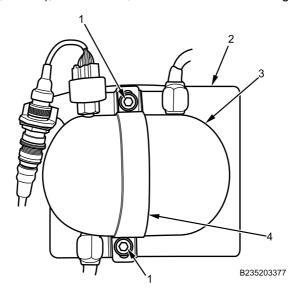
Receiver/Drier Mounting Plate and Clamp.
